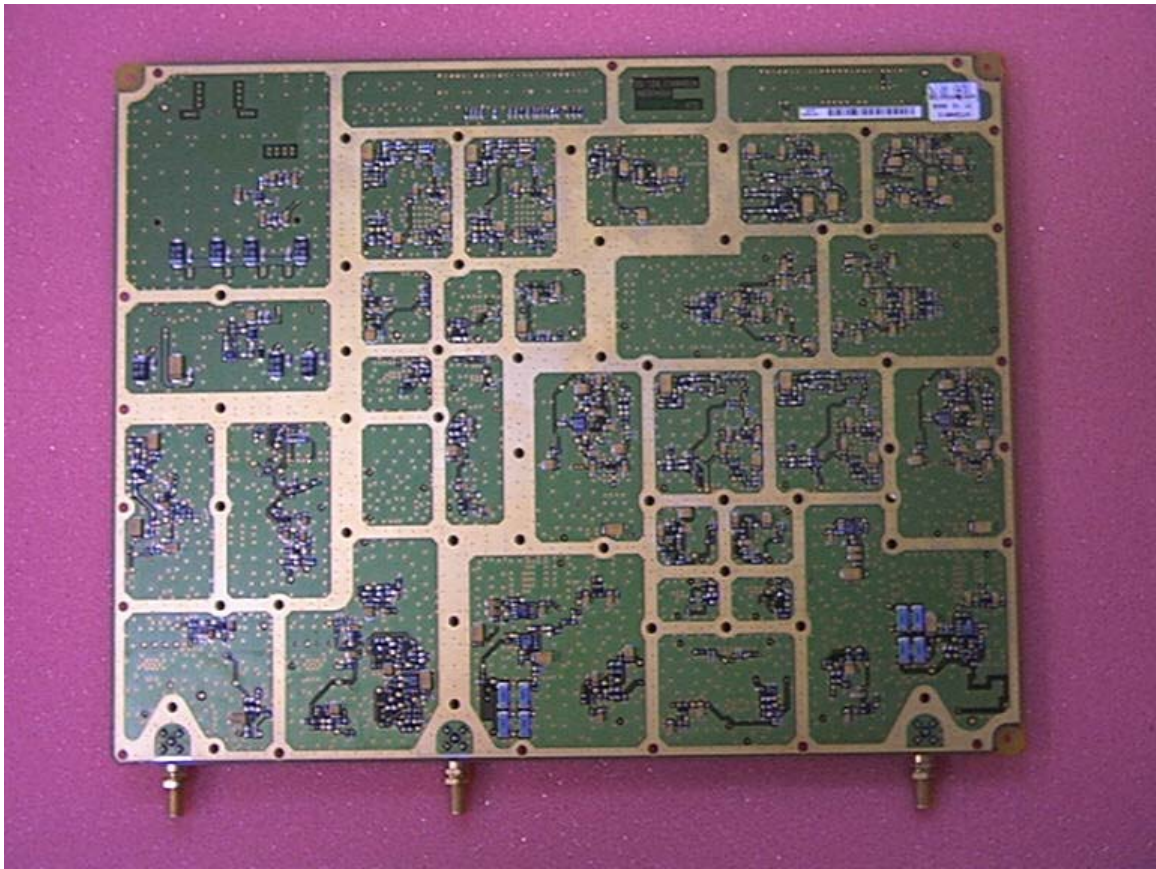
E-RDRX 850 MHz (Radio Board) Bottom View
